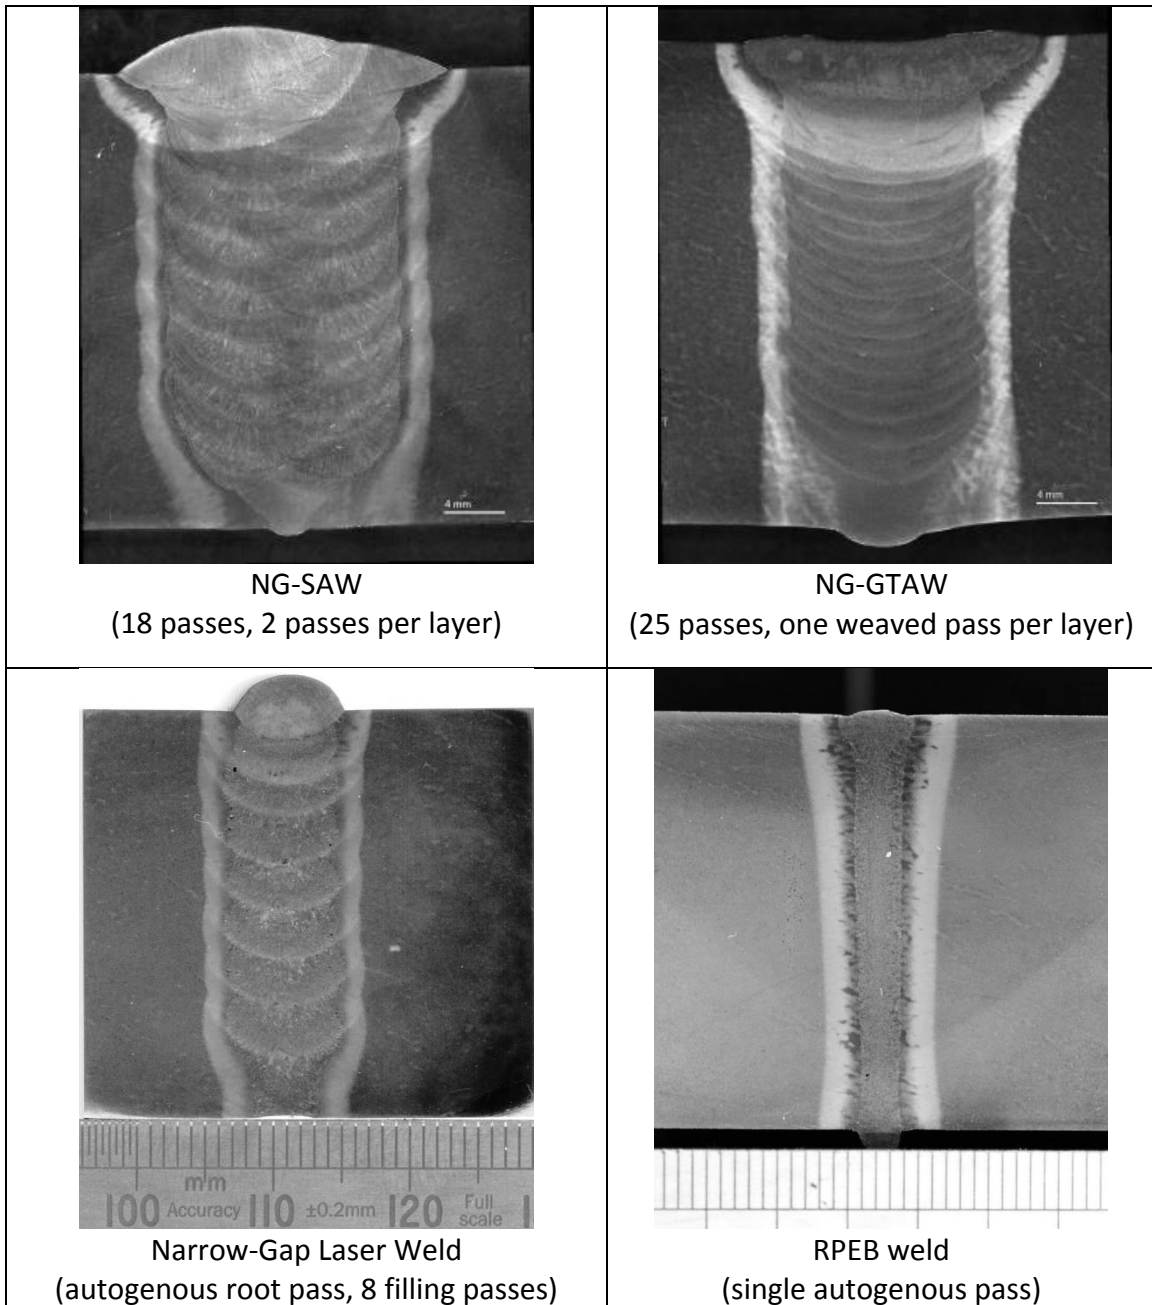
Macrographs for each type of weld: NG-SAW (top left), NG-GTAW (top right), NGLW (bottom left) and RPEB weld (bottom right).
